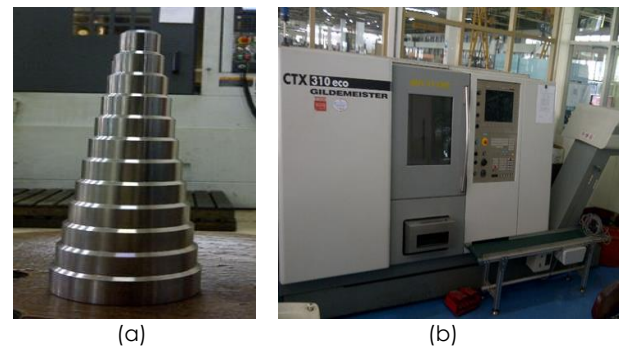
(a). Prepared workpiece (b). CNC machine used in experiments
